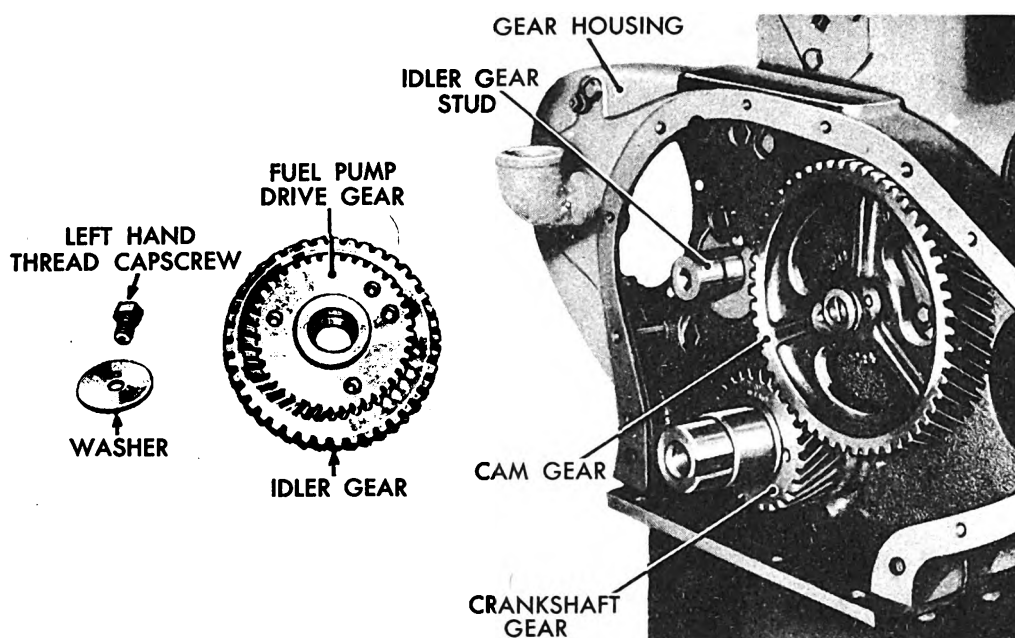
Installing Idler and Pump Drive Gear Assembly
